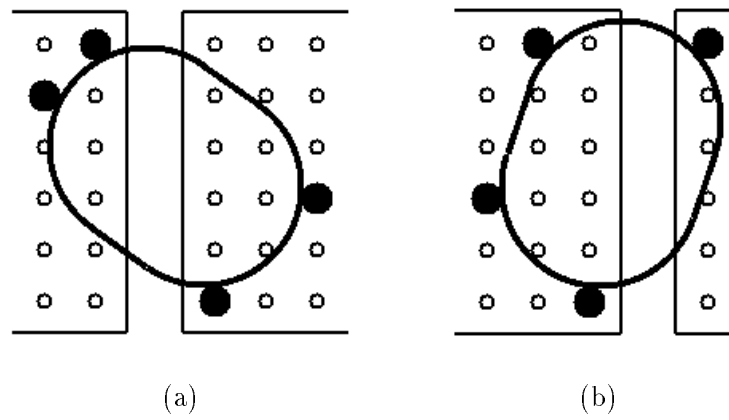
(a) a Type I fixture for oblongPart, an oblong cap (b) a Type II fixture for oblongPart
